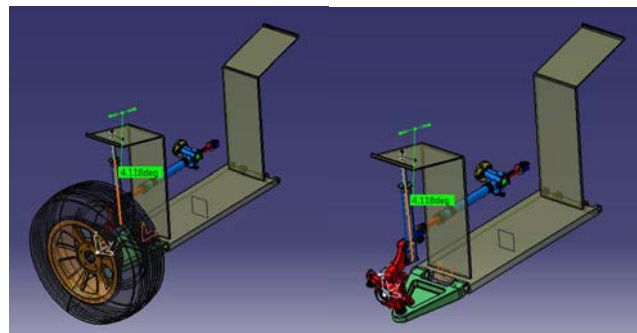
CAD model of the suspension-steering, considering the caster angle
